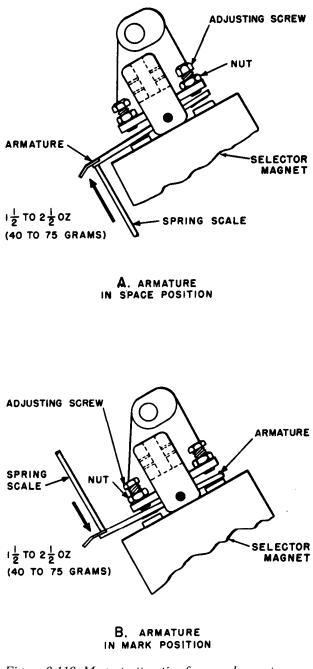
Magnet attractive force and armature clearance adjustment.
